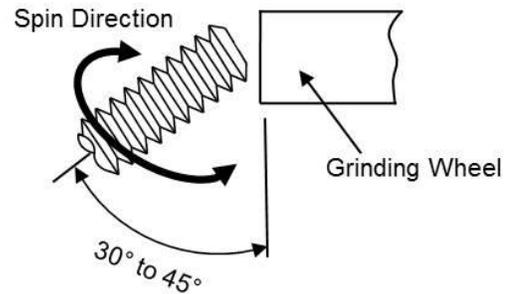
Dressing the end of a tang with a Grinding wheel
